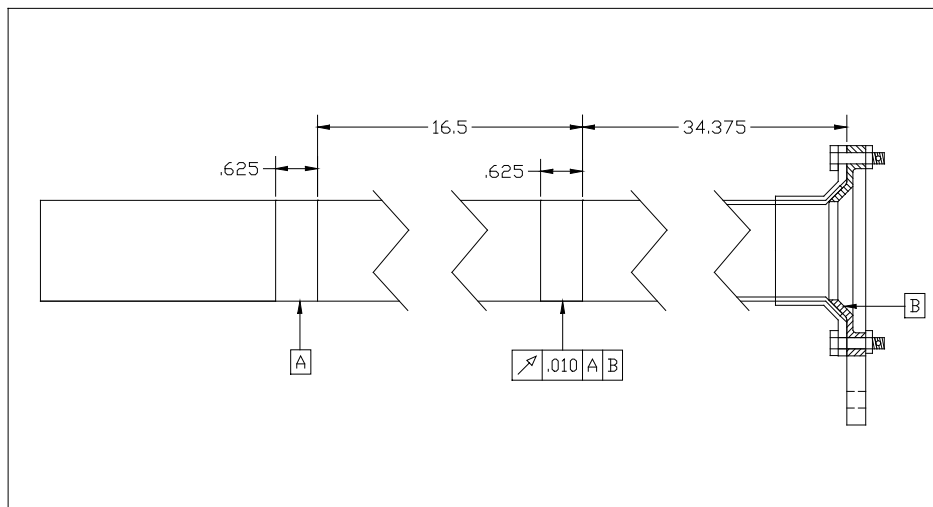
AT-278-100 Run-out Inspection
